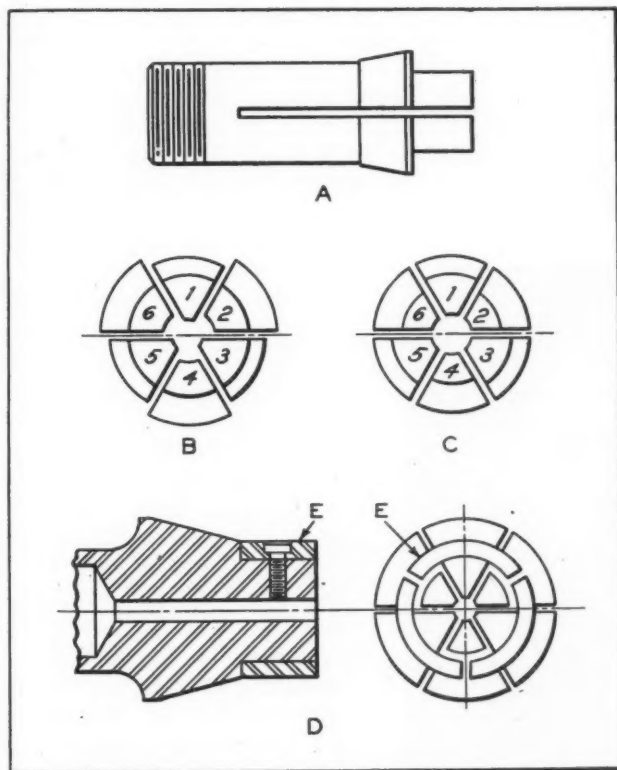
Internal Expanding Collet Designs for Use on Screw Machines and Lathes
